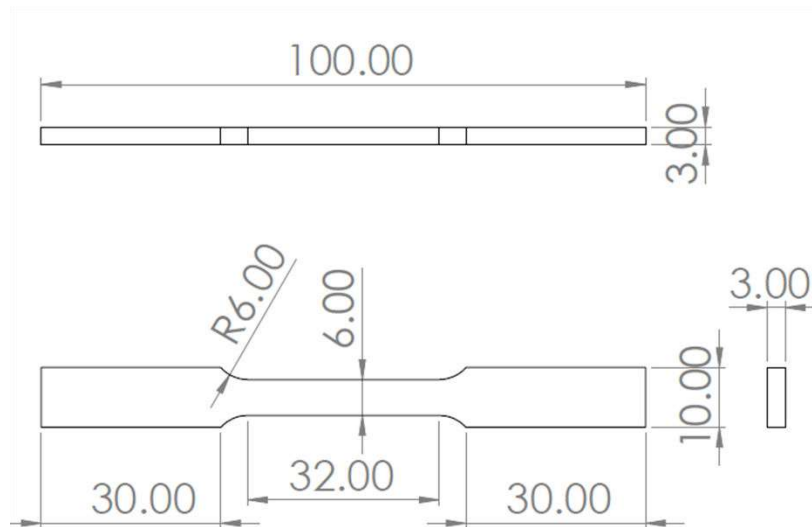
Schematic with dimension of tensile coupon as per ASTM E8 standard.
